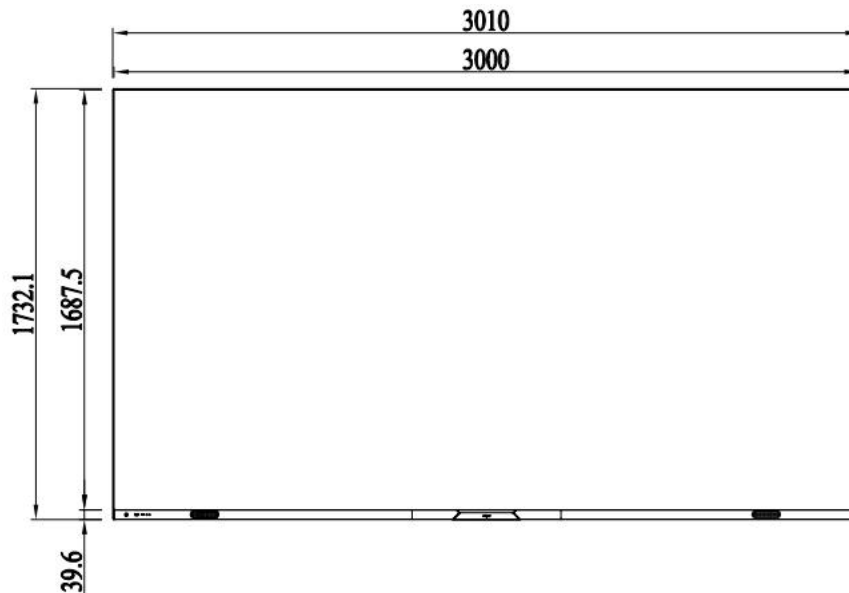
X 4K136 Wall-mounted Schematic Diagram
